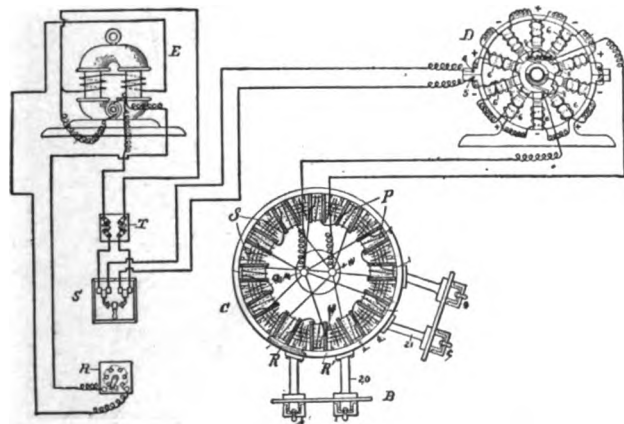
ARRANGEMENT OF WELDING DYNAMO AND TRANSFORMER.
